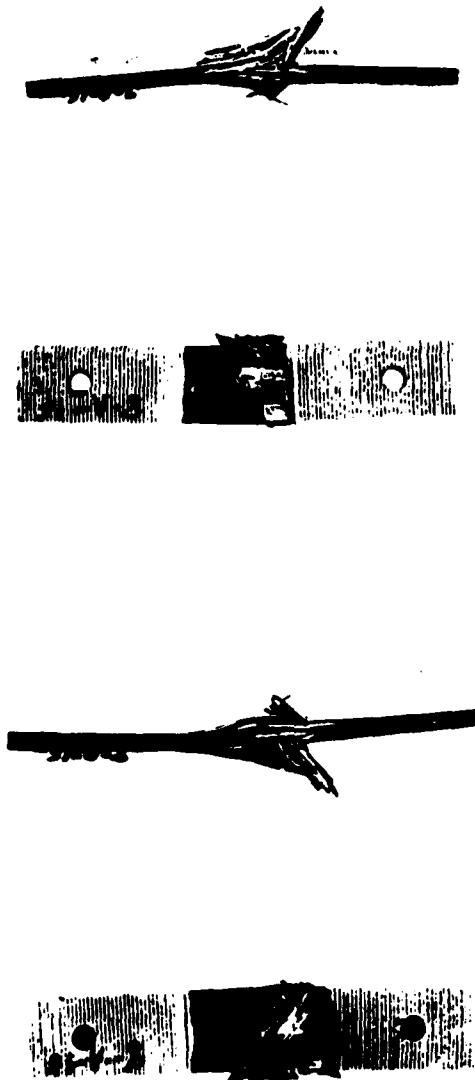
Static Unnotched Failure - Specimen 8-A-16
